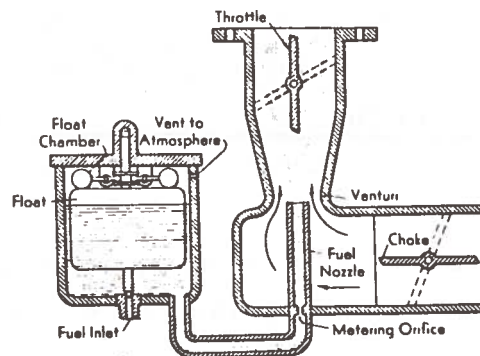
Elements of a Simple Updraft Carburetor (Ref. 3-1).
